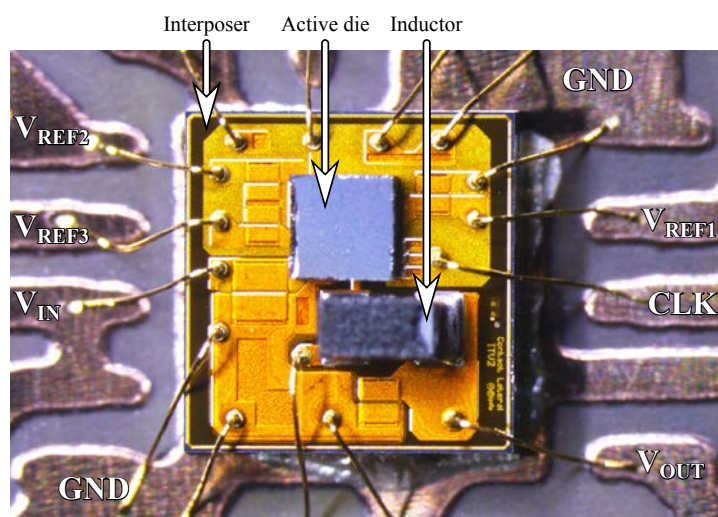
Micro-photograph of the converter assembly on interposer.
